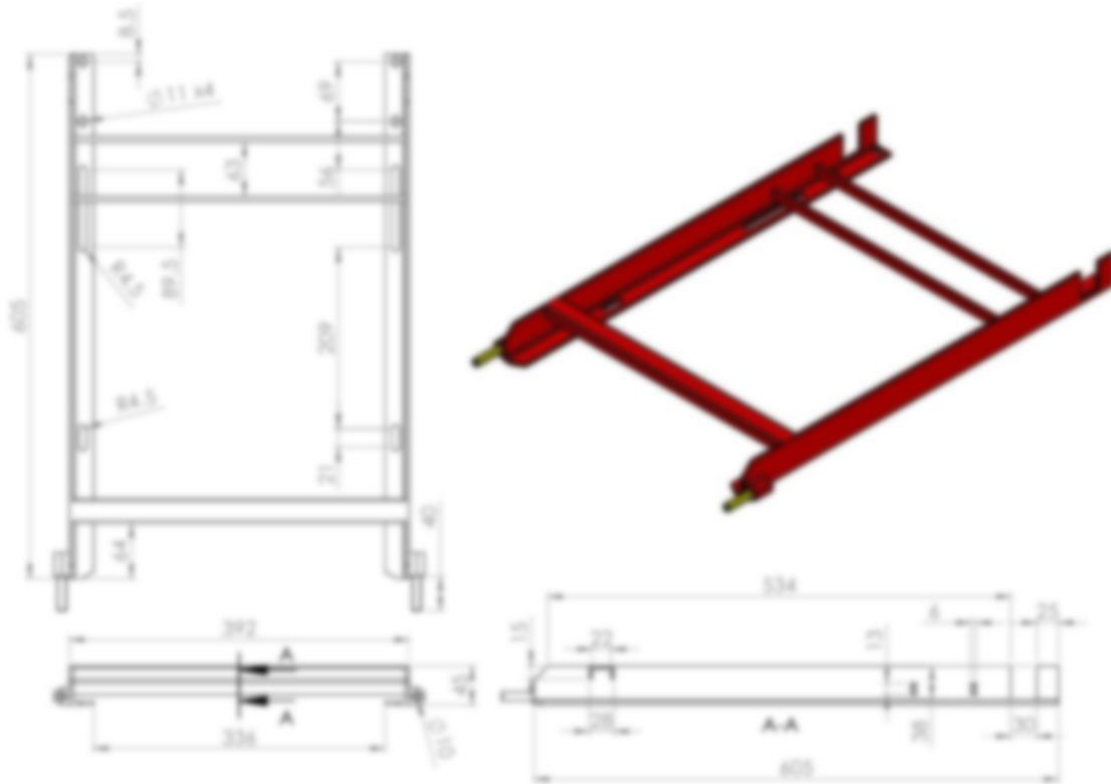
Mechanical Design and Dimensions of The Feeding System Base
